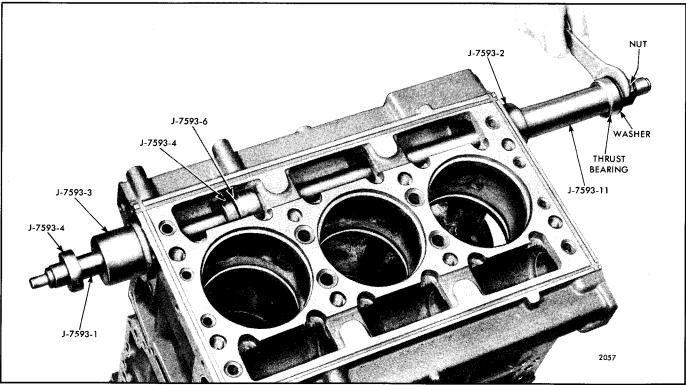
Installing Intermediate Camshaft Bearing using Tool Set J 7593-03
